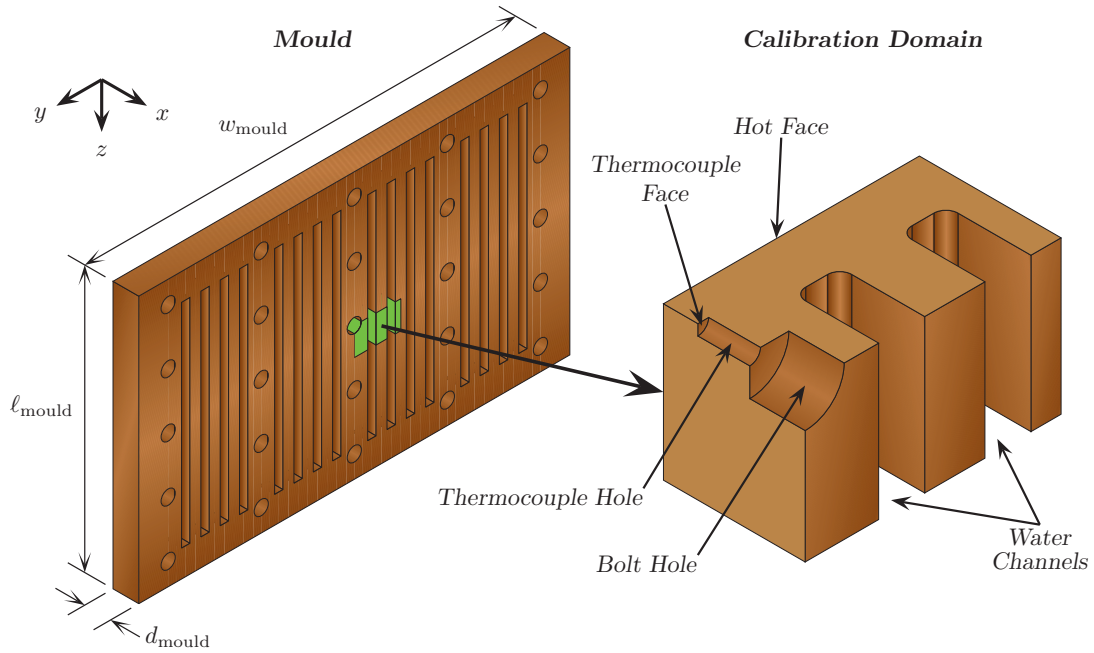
Back of a typical continuous casting mould showing the calibration domain.
